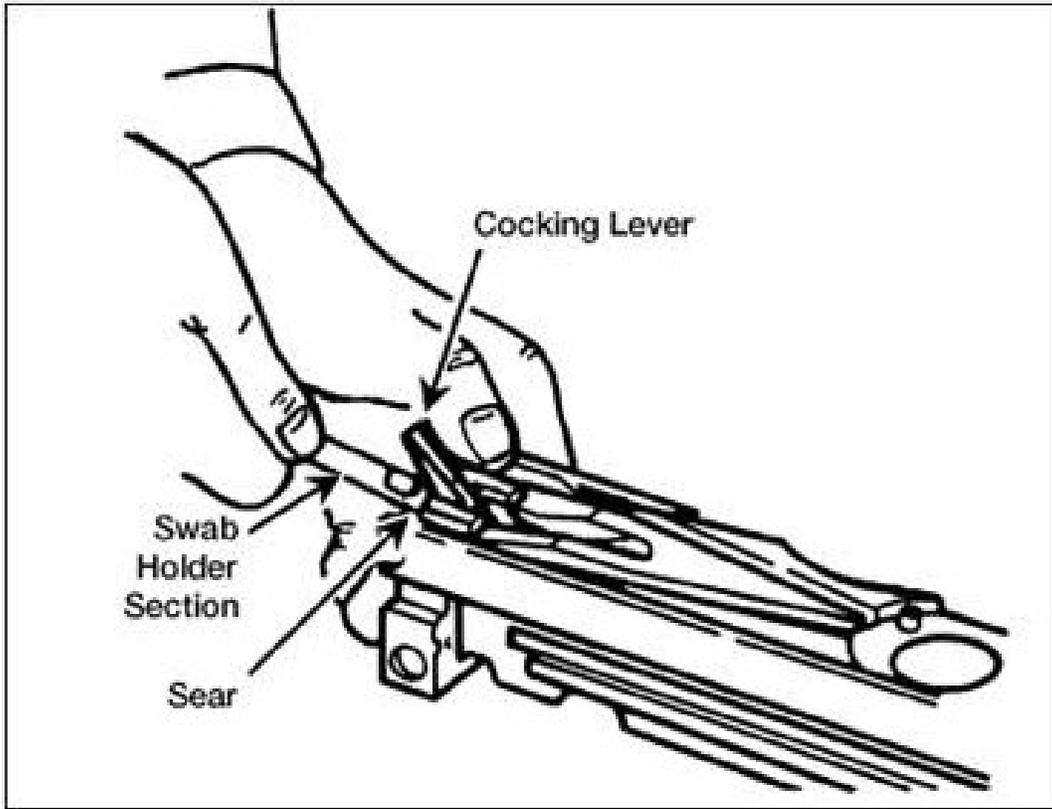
ST-1025_10 (Releasing the firing pin spring)
